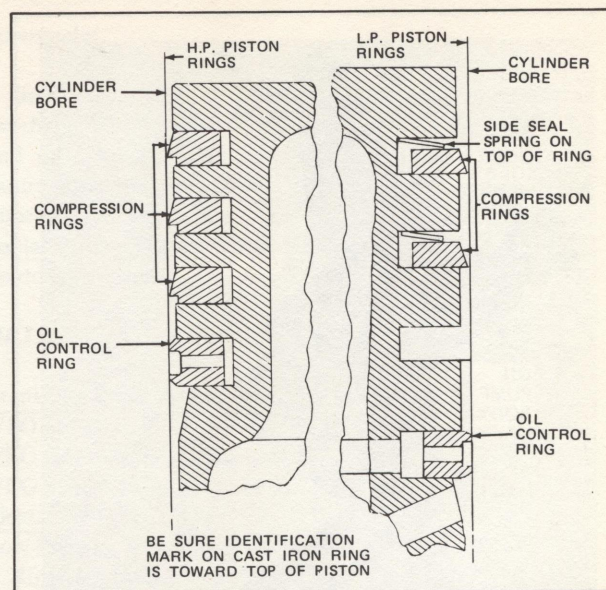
PROPER PISTON RING ARRANGEMENT.
